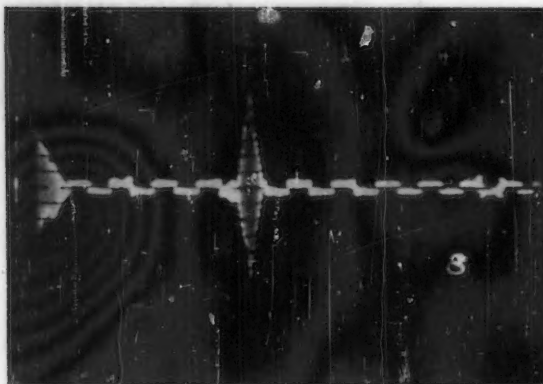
Indication of a Large Burst at Center Line of Shaft.
